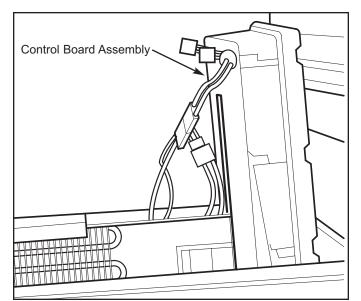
700BCI-3 & 700BFI-3 Control Board Assembly
